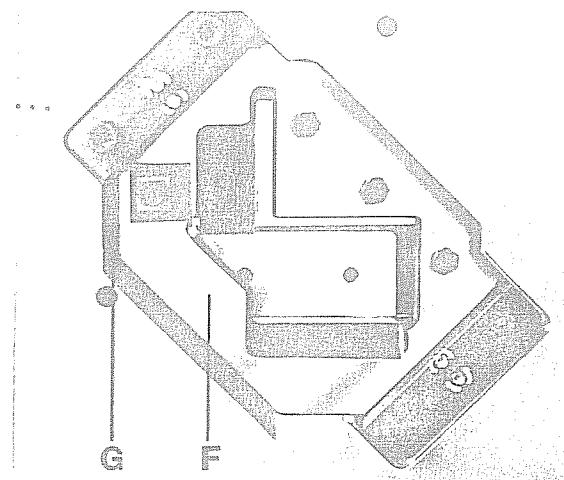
PMG section blade, seen from cover plate side (KBLH 500/700)
